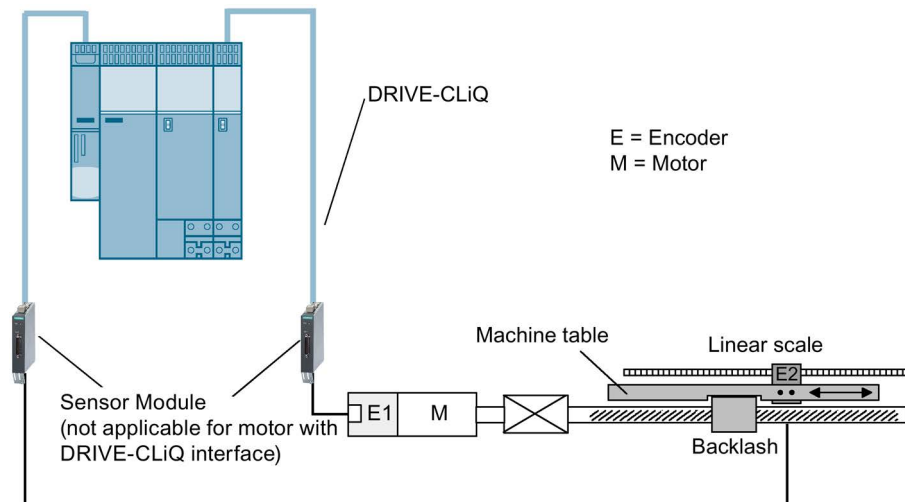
Example of a 2-encoder system on a linear axis via a ball screw
